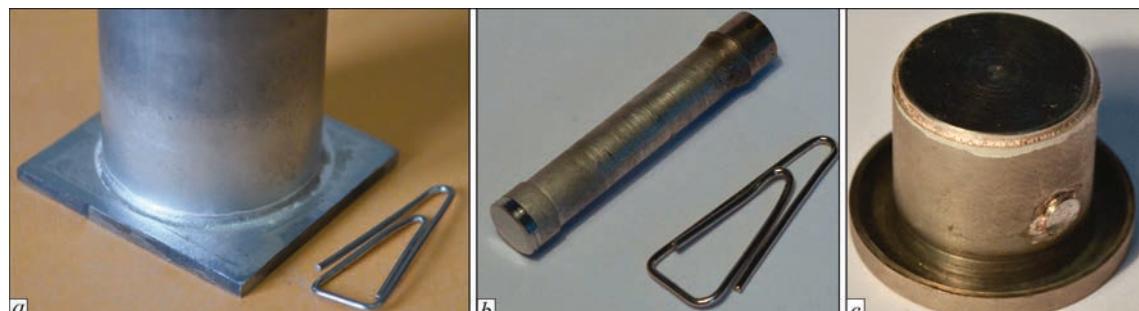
Brazed specimens of dissimilar materials kovar–titanium alloy: model specimen for tests on sealing (a); tubular element (b); brazed assembly with plug (c)
